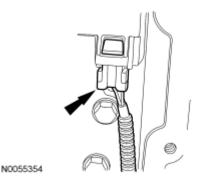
Identifying TR Sensor Electrical Connector Courtesy of FORD MOTOR CO.
